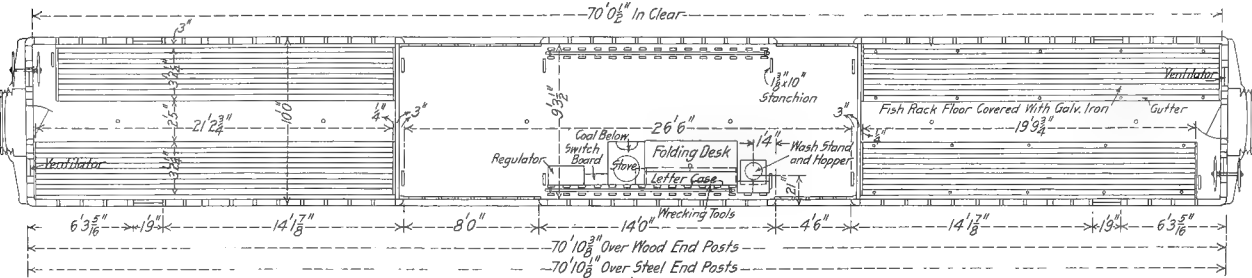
Floor Plan of Missouri Pacific Baggage Car. Builder, American Car & Foundry Company.
